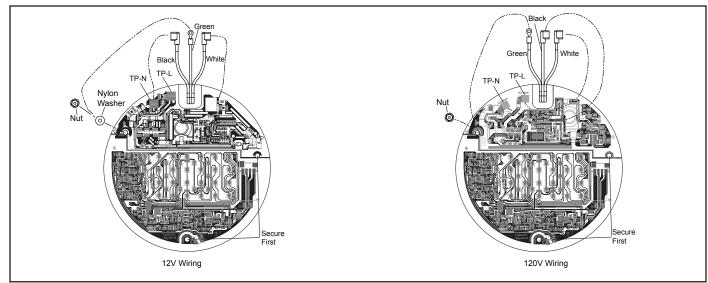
Large Light Engine (PCB) Replacement and Wiring
